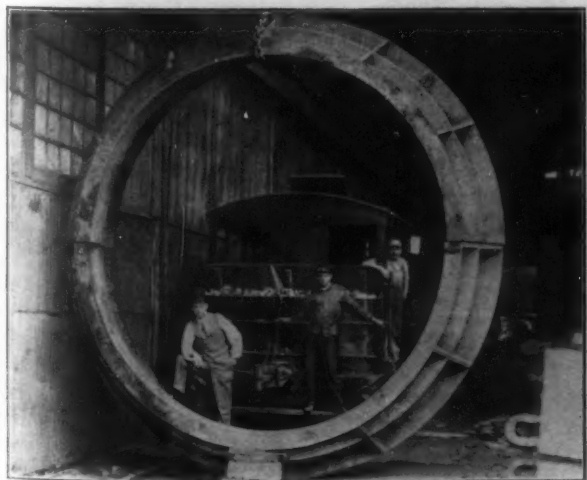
One of Five Large Thrust Bearing Thimbles.
